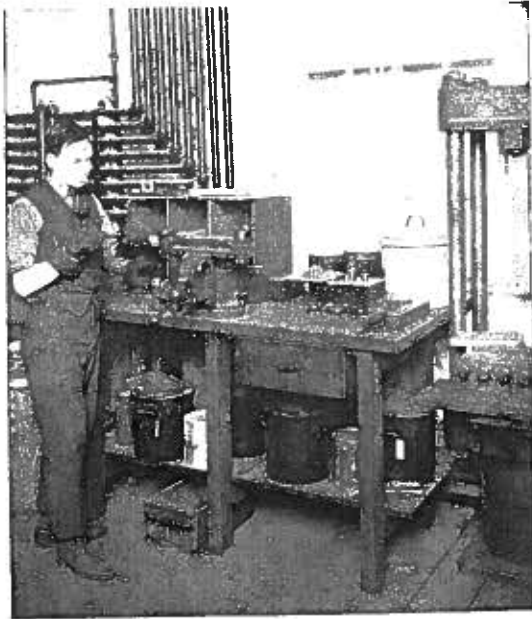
MOLD AND HYDRAULIC PRESS FOR MAKING RODS FROM TUNGSTEN AND MOLYBDENUM POWDER. The operator is removing a rod from the mold after pressing in the hydraulic press at the right.
